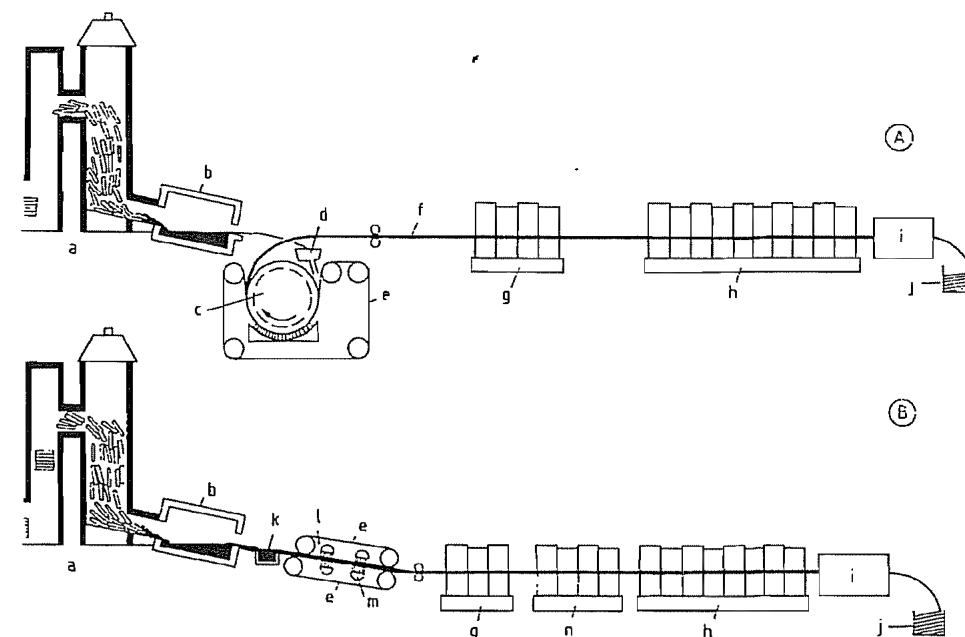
Scheme of continuous rod casting and rolling [186]. A) Southwire process; B) Contirod process. a) Melting furnace (ASARCO); b) Holding furnace; c) Wheel; d) Tundish; e) Steel band; f) Continuously cast copper bar; g) Preliminary rolling mill train; h) Finishing rolling mill train; i) Pickler; j) Coiler; k) Casting receptacle; l) Casting canal; m) Stationary edge dams; n) Middle rolling mill train.
